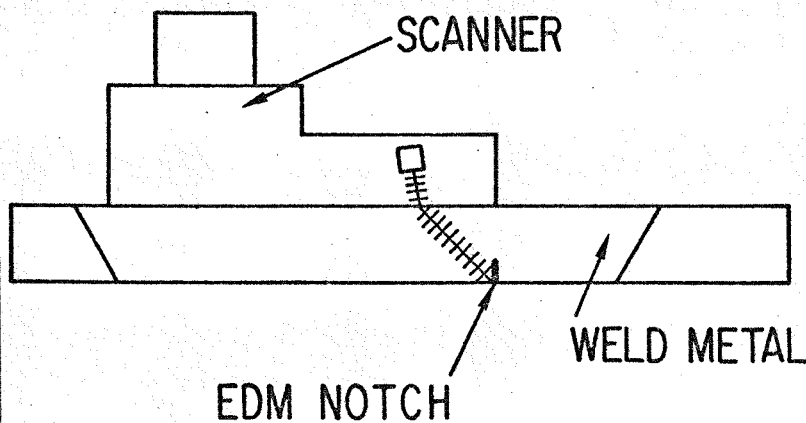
Arrangement of Scanner and Specimen for Detection of Weld-metal Notch. The scanner generated 45° longitudinal waves in the weld metal.
